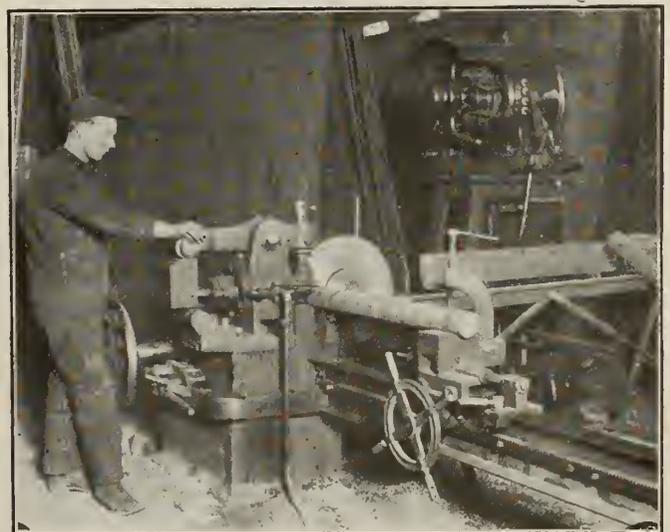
FIG. B—NEWTON SAW SHOWING MOTOR AND STEEL BAR FEED MECHANISM.
